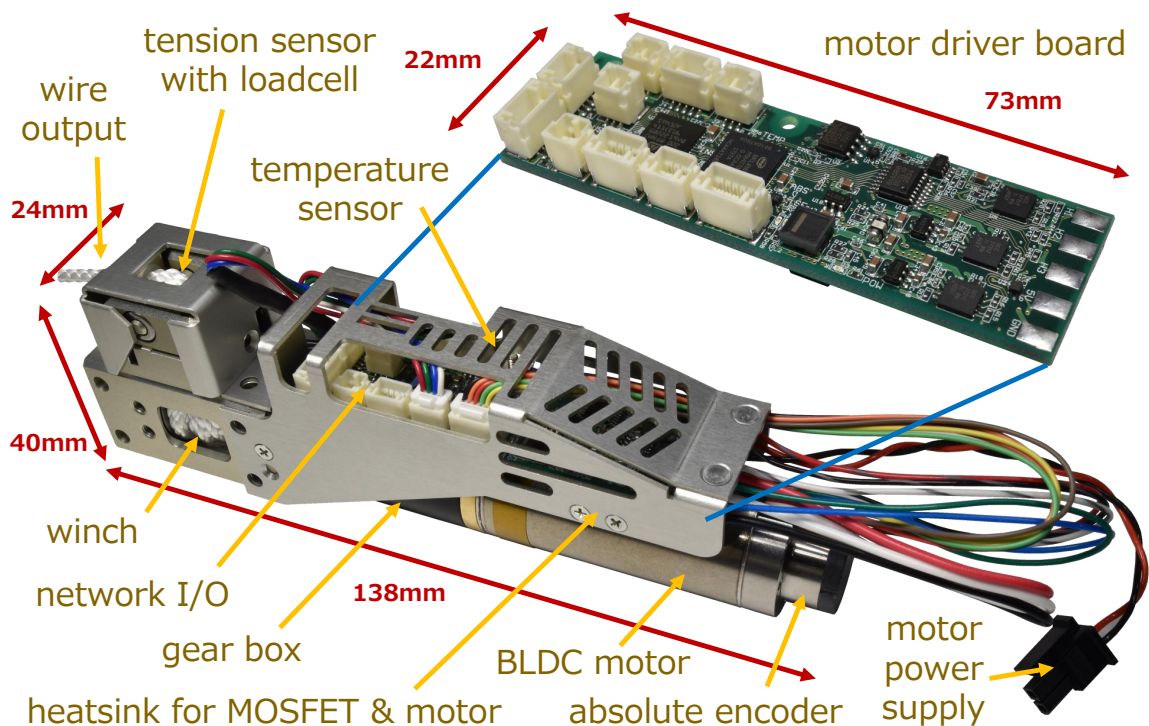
Overview of the wire actuator module with the motor driver board FPGA-03D
